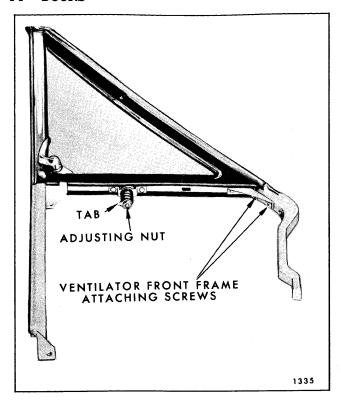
Front Door Ventilator Assembly - "A" Style Shown - "X & Z" Similar
